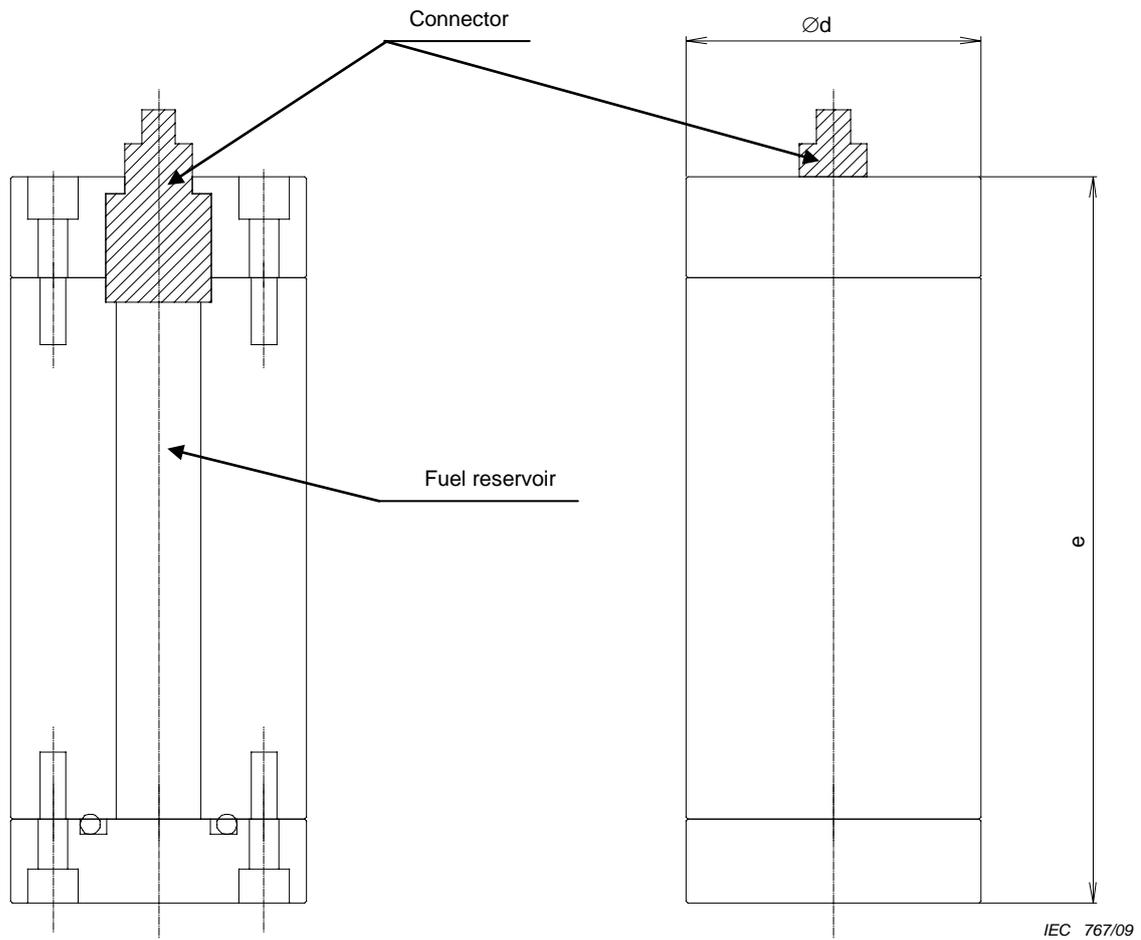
Device test fixture for cartridge testing of 4.4.9
